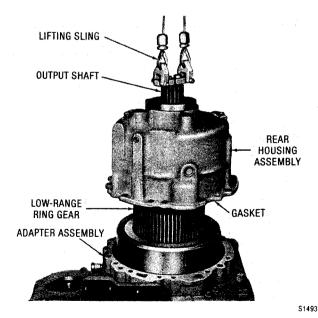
Installing rear housing assembly (TRT-3 underdrive)
